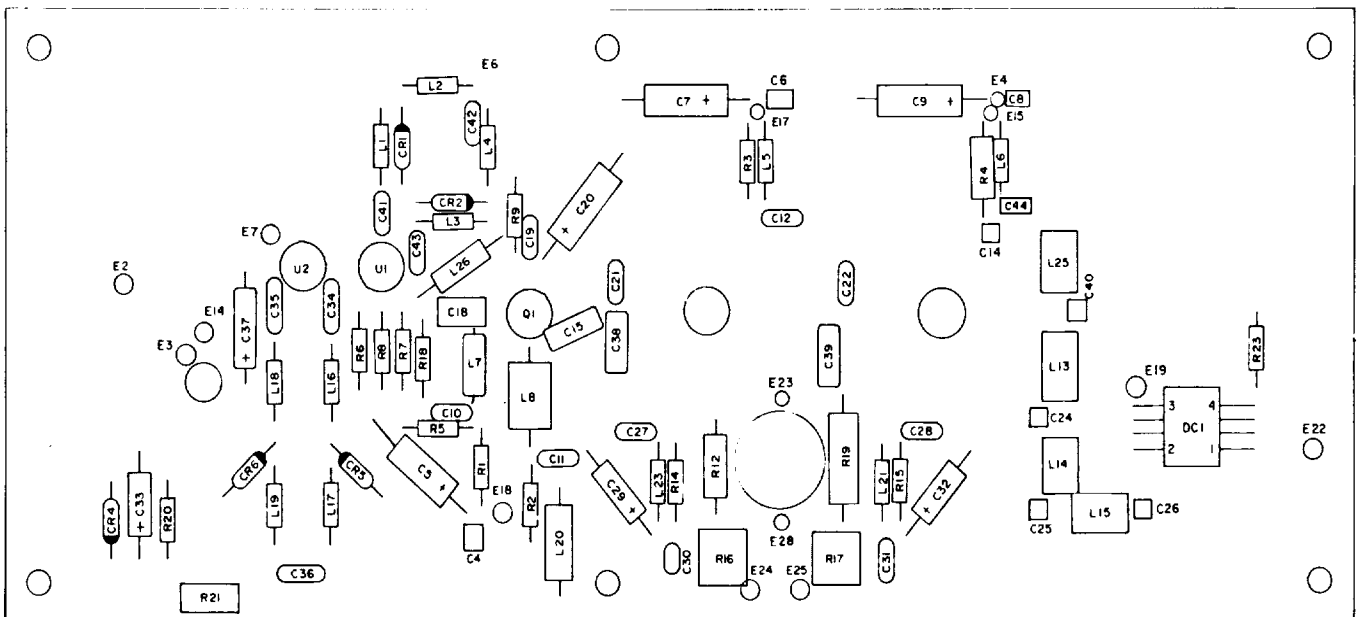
RF Amplifier Circuit Card Assembly, 1A5A2A1 and 1A5A3A1 Parts Location Diagram
